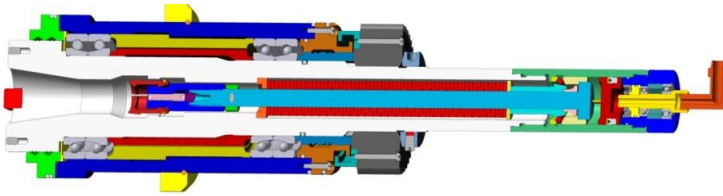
Three-dimensional model of the spindle node assembly (section)
